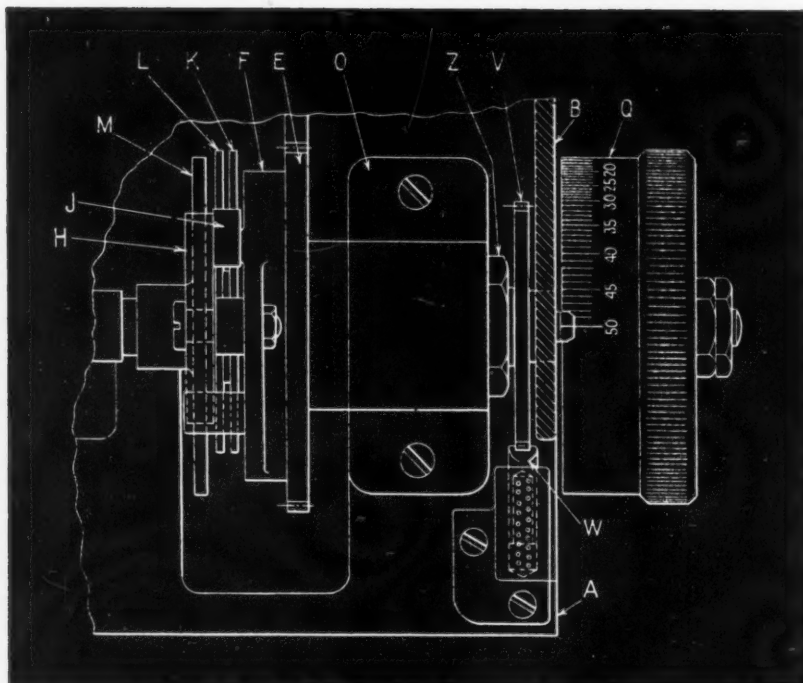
Partial Plan View of Feeding Mechanism, Illustrating how the Setting on Index-wheel Q is Held by the Detent of Spring Plunger W Entering between the Teeth of Gear V
